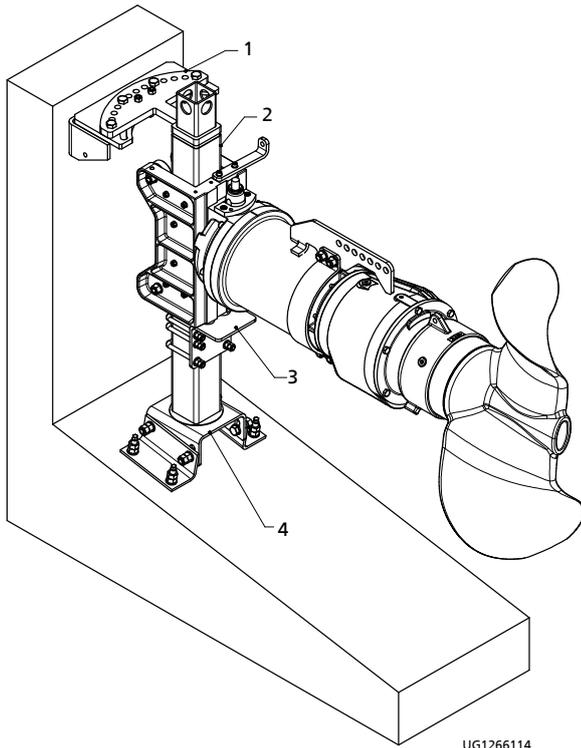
Installation example: Amaprop 1000 mounted on tank wall and horizontal tank floor
